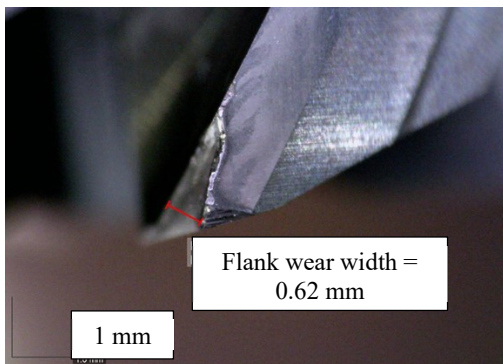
Tool wear on the flank face of the most worn cutting edge after machining.
